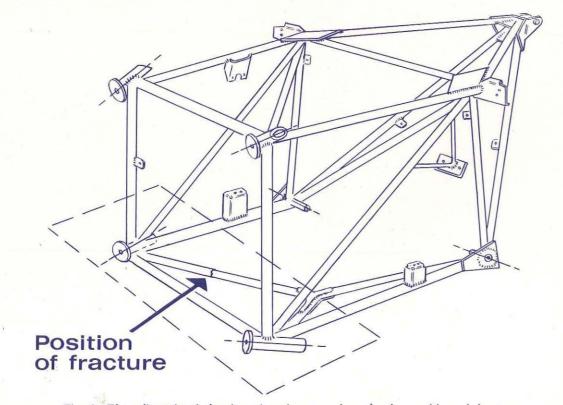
Three-dimensional drawing of engine mounting, showing position of fracture.
